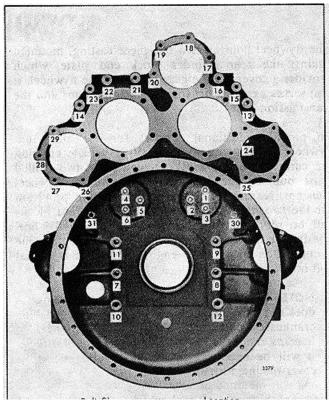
Flywheel Housing Bolt Tightening Sequence (Operation 2)
